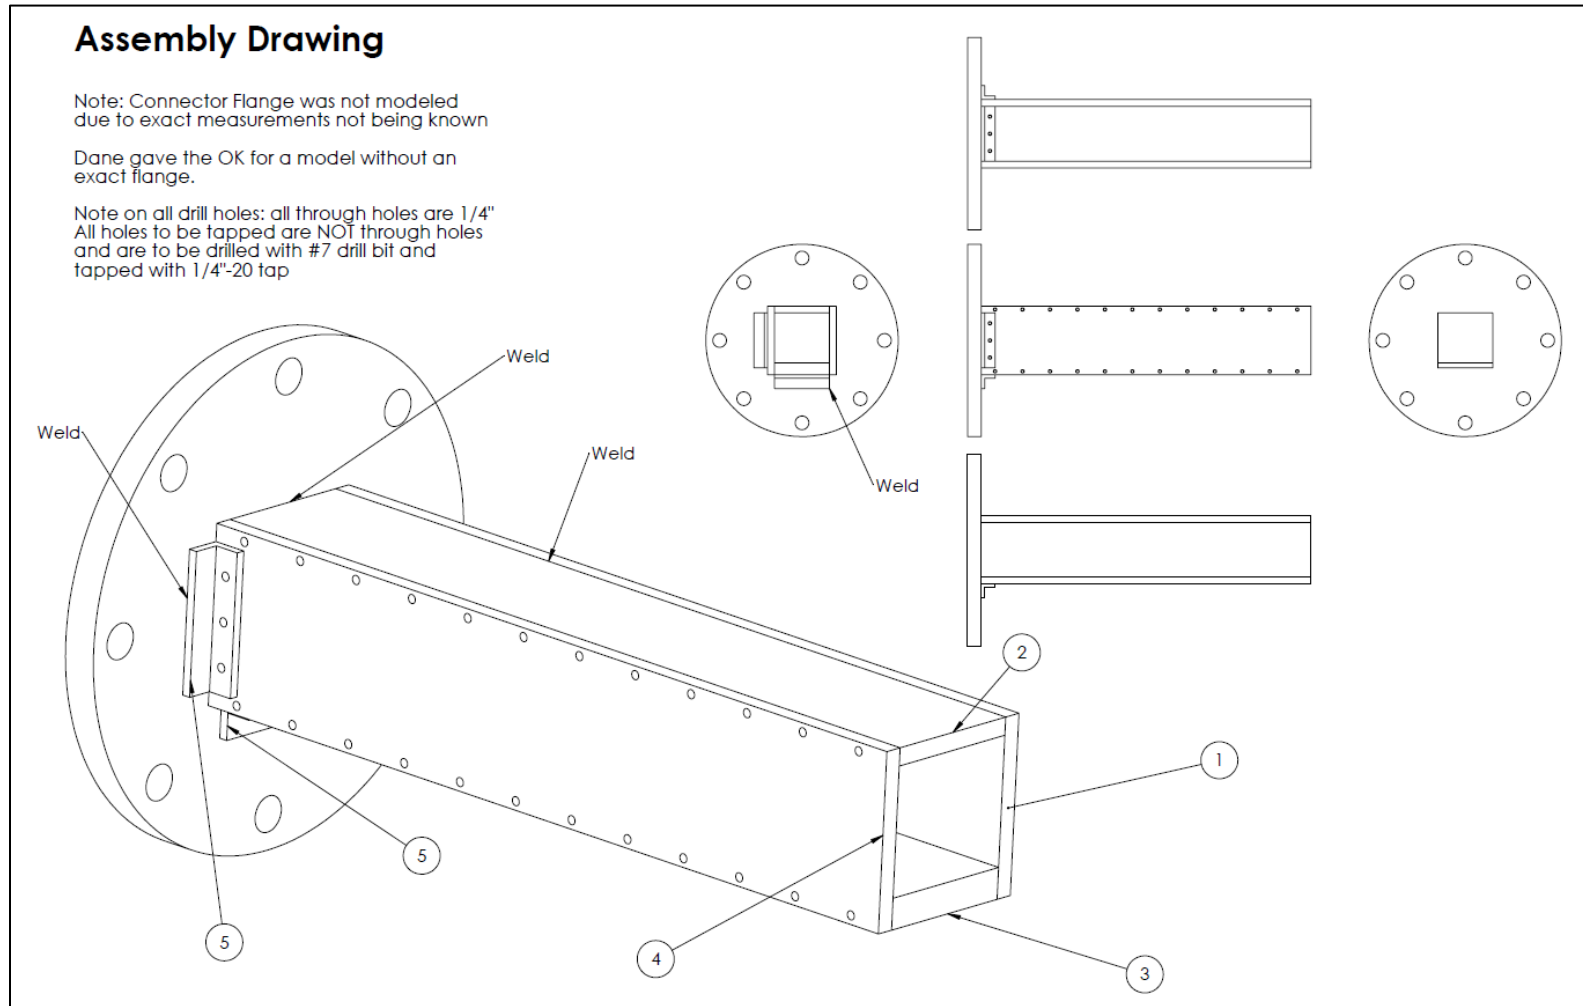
Technical Assembly Drawing of Final Cavitation Tunnel Design
